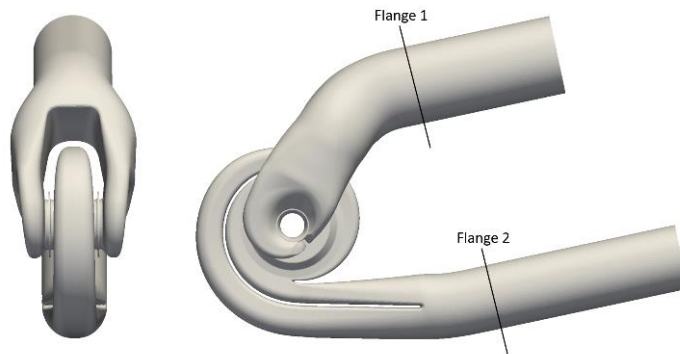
Front and side view of the CAD representing the centrifugal pump.
